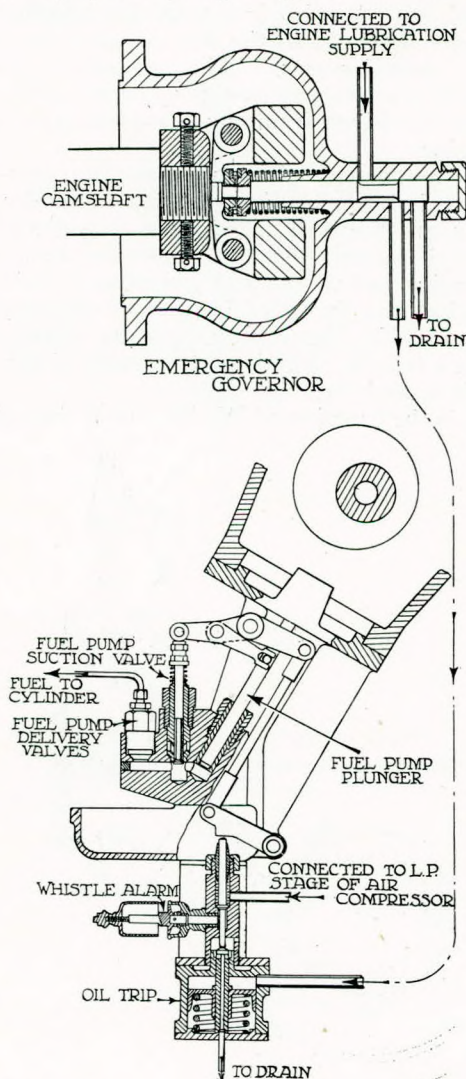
The Fraser and Chalmers emergency governing and lubricating-oil relay arrangement is shown above.
